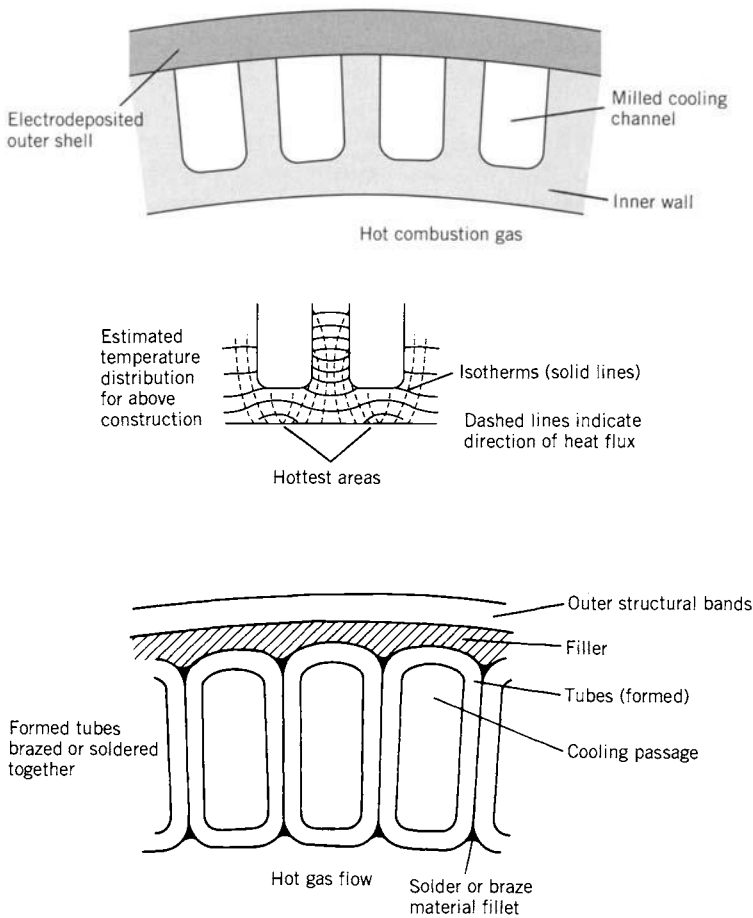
shows a cross section of a cooling jacket for a large, regeneratively cooled thrust chamber with formed tapered tubes that are brazed together. The other fabrication technique is to machine nearly rectangular grooves of variable width and depth into the surface of a relatively thick contoured high-conductivity chamber and nozzle wall liner; the grooves are then filled with wax and, by an electrolyte plating technique, a wall of nickel is added to enclose the coolant passages (see Fig. 8-17). The wax is then melted out. As with tubular cooling jackets, a suitable inlet and outlet manifolds are needed to distribute and collect the coolant flow. The figure also shows the locations of maximum wall temperature. For propellant combinations with corrosive or aggressive oxidizers (nitric acid or nitrogen tetroxide) stainless steel is often used as the inner wall material, because copper would chemically react. The depth and width of milled slots (or the area inside formed tubes) vary with the chamber-nozzle profile and its diameters. At the throat region the cooling velocity needs to be at its highest and therefore the cooling passage cross section will be at its lowest.
